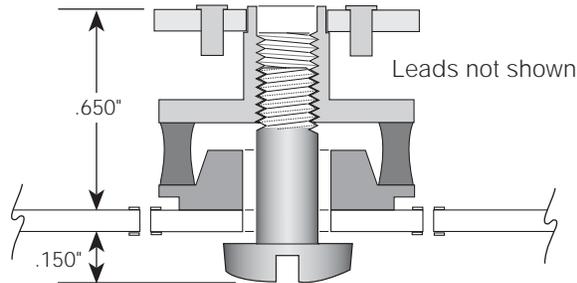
The low profile, PC mounting, vertical ISO-SOCKET is shown above. The contacts are gold plated brass, the socket body is blue G10 fiberglass and Sorbothane is used for the decoupling elastomer.
